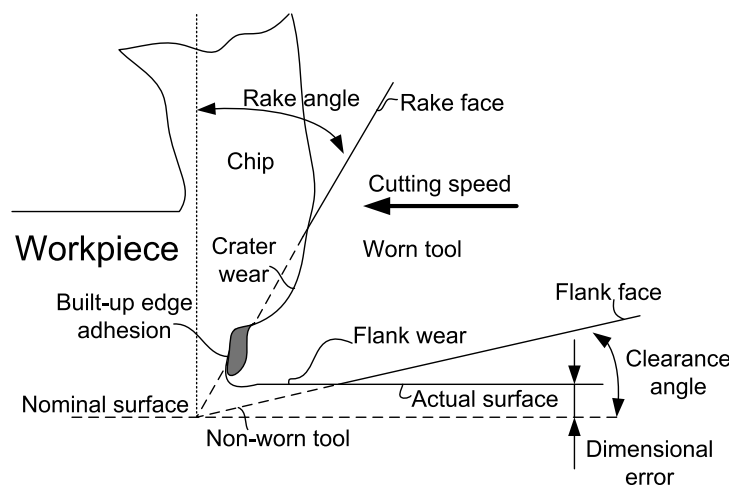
Example of cutting-tool wear-induced error in machining.
